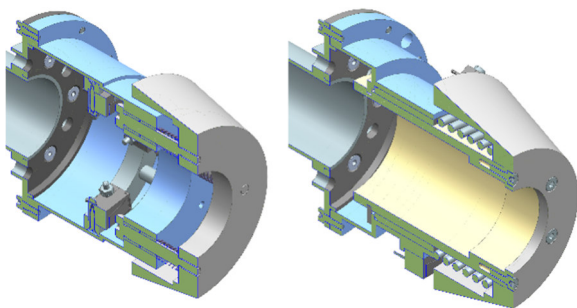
Cross section view of the two tactile feedback concepts (left: tactile head mounted to locating bolts and springs; right: single hollow shaft and spring).
